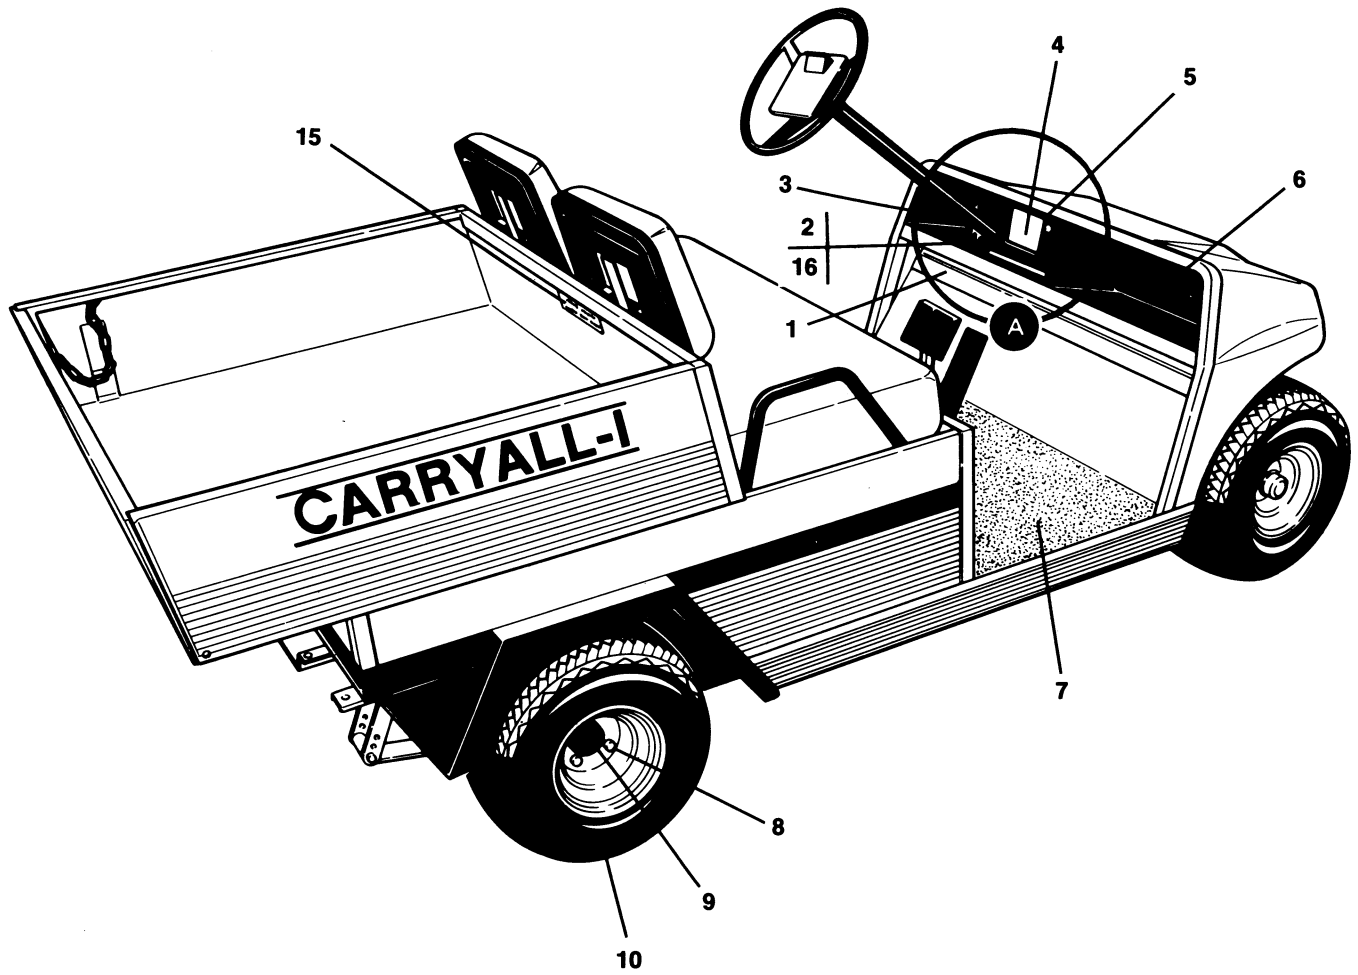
FINAL ASSEMBLY. SEE LIST 1-1.
